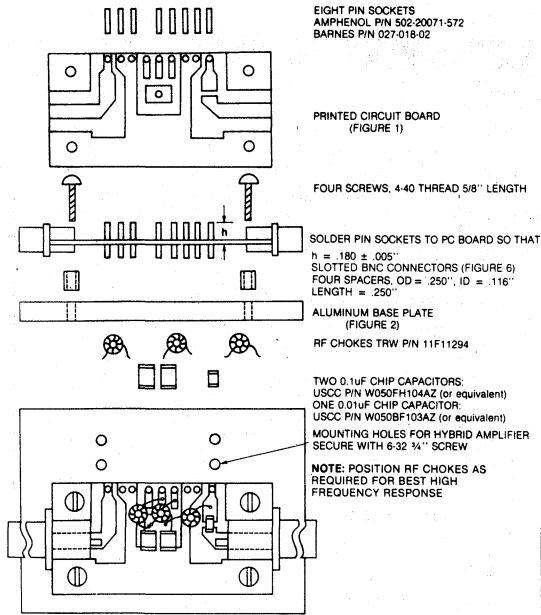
CA2820 Test Fixture Assembly (Case 714F-01)
